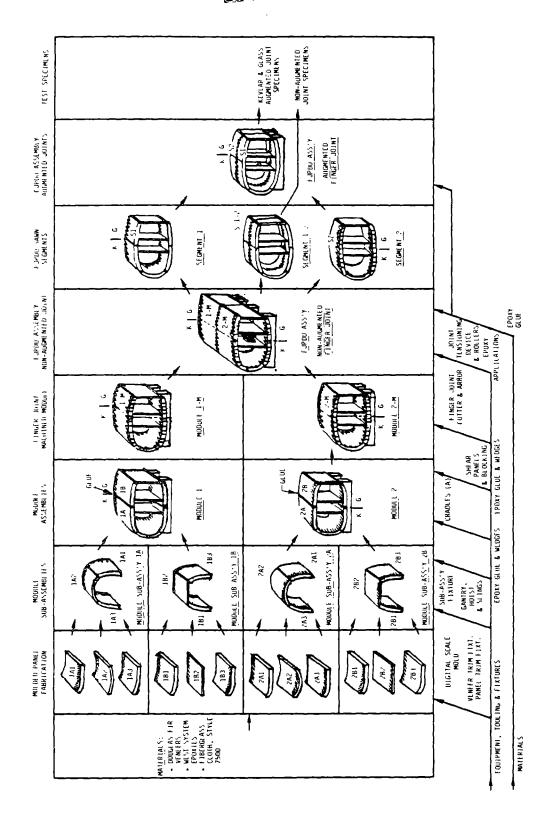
Finger Joint Process Development Unit Assembly Flow
